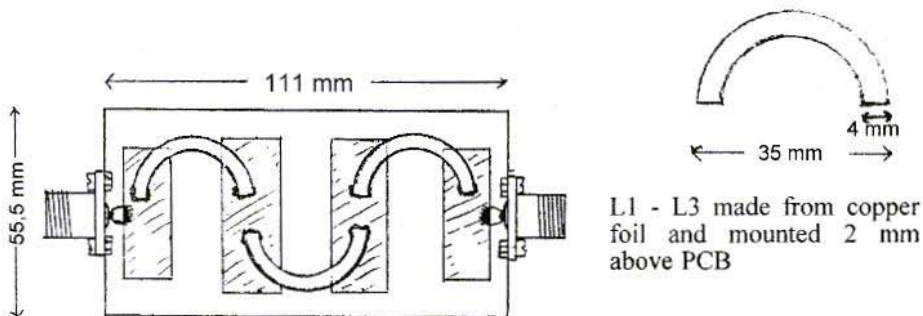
PCB Layout for the 435 MHz Filter using RT Duroid 0.79 mm thick
